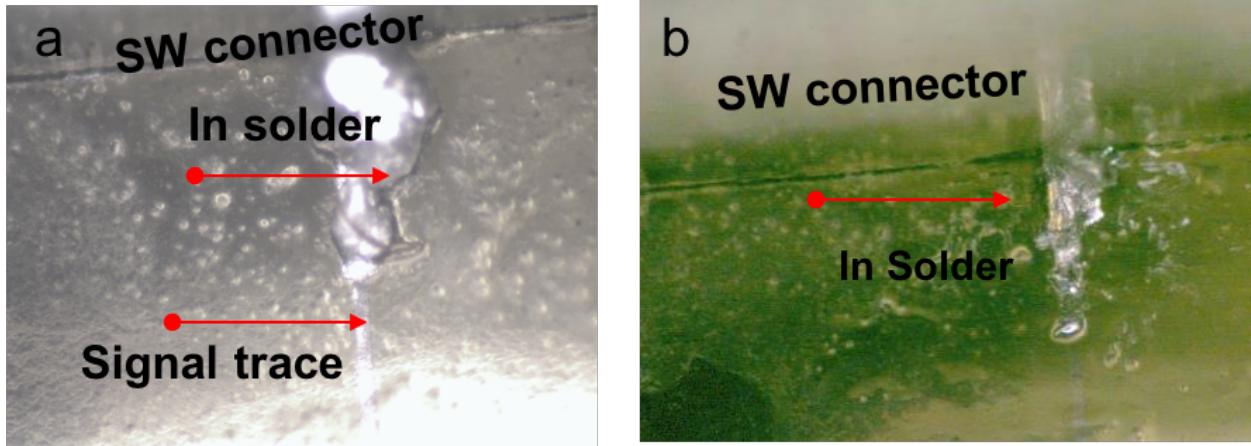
Microscopy images of the excess solder on a ~ 15 cm long Nb microstrip cable (a) as assembled and (b) after excess solder removal
